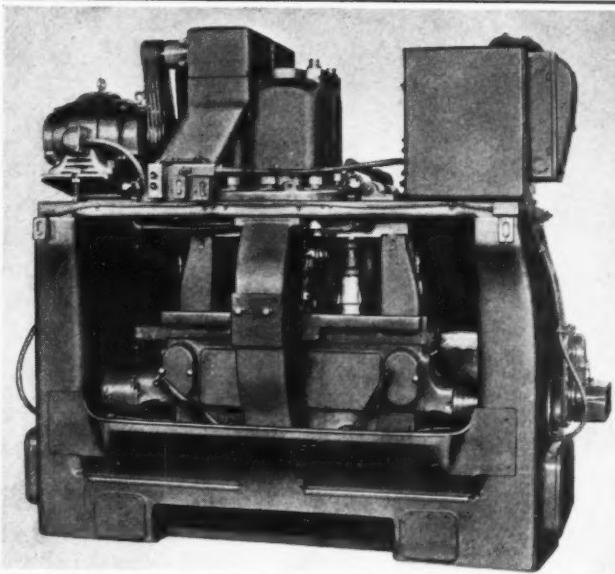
"Rotomill," Brought out by the National Broach & Machine Co.
